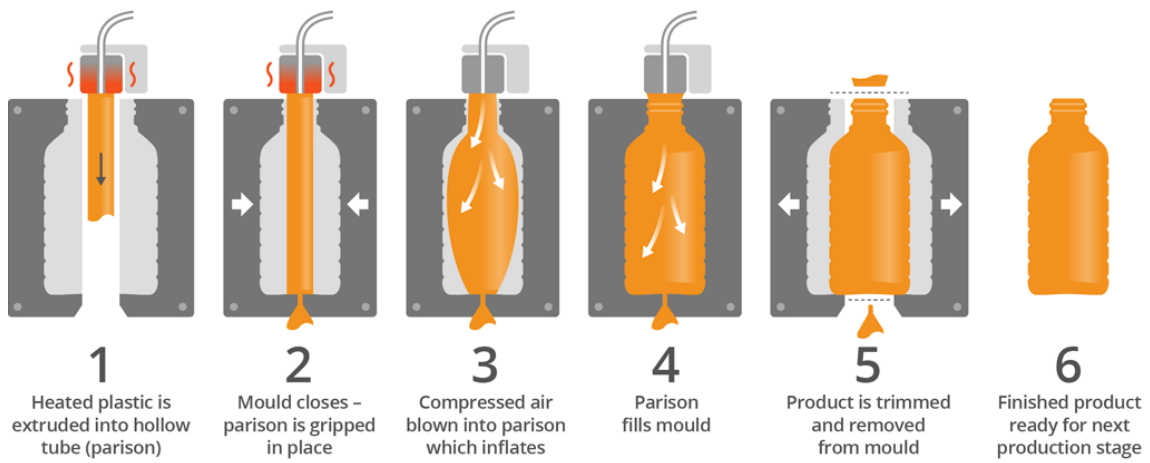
Blow moulding stages of the extrusion and blow moulding process
